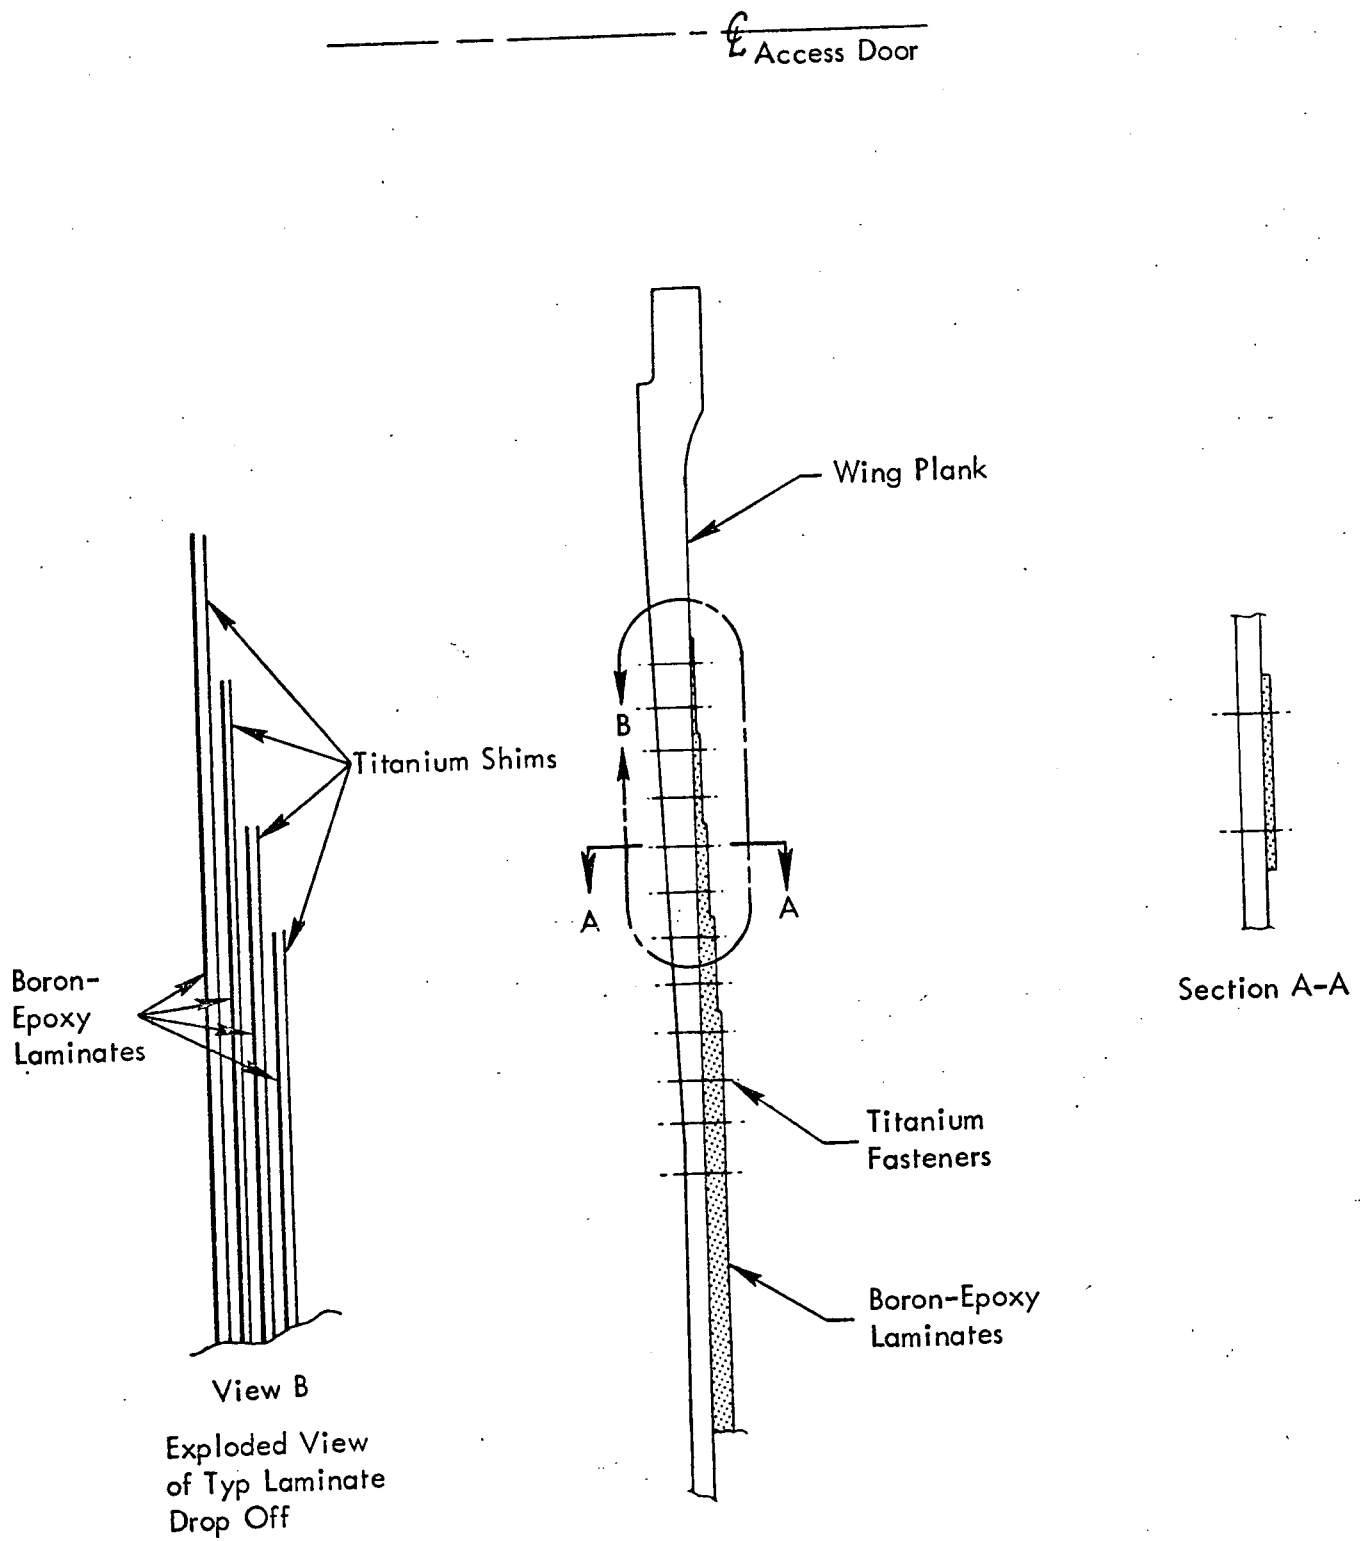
TYPICAL WING PLANK AND LAMINATE RUN OUT AT ACCESS DOOR
